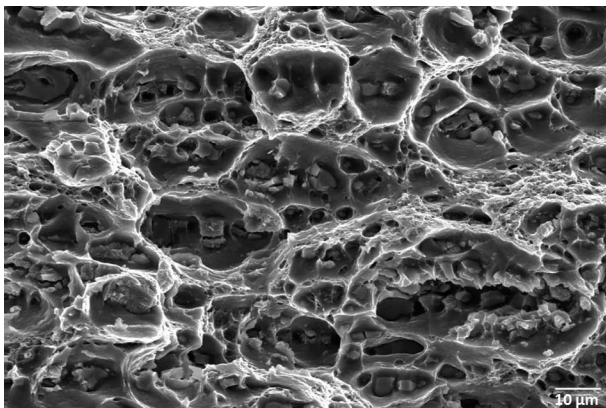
Higher magnified image of fracture surface shown in Fig. 106 indicating dimples throughout the surface. Note the presence particle in each of the dimples
